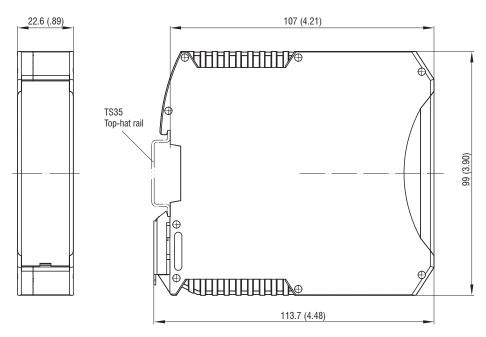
IF2035-EIP dimensional drawing, dimensions in mm
